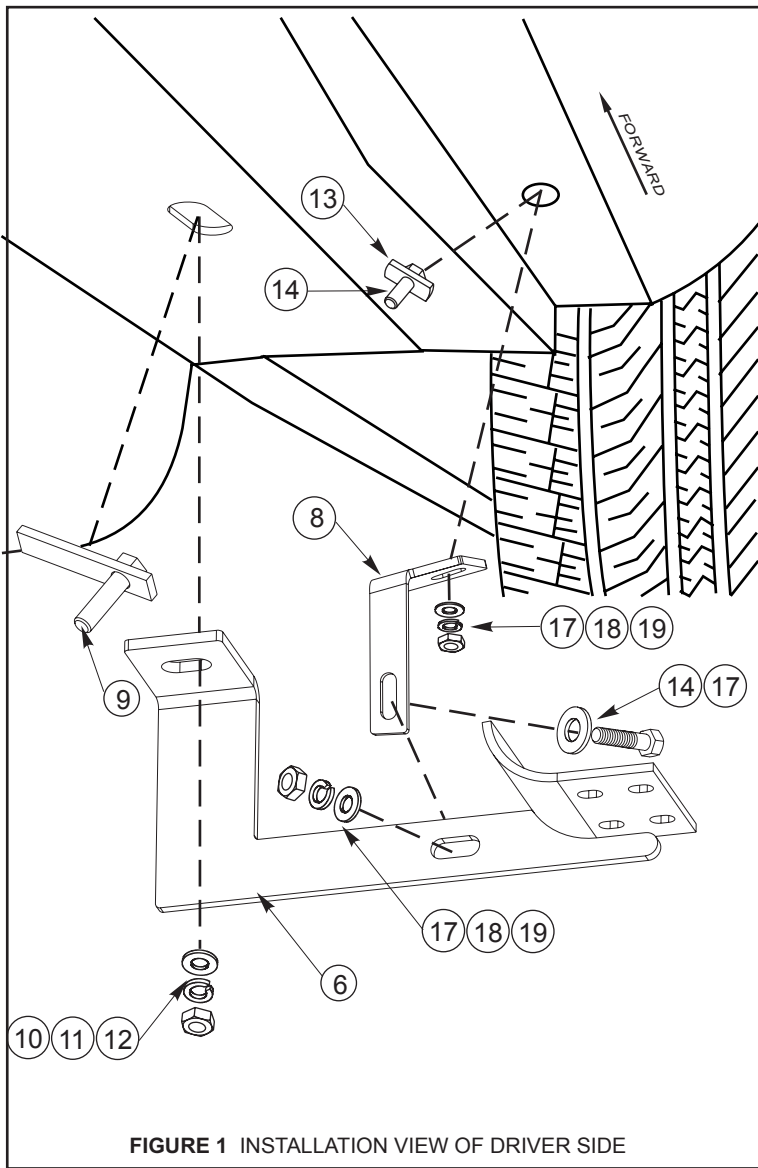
INSTALLATION VIEW OF DRIVER SIDE
